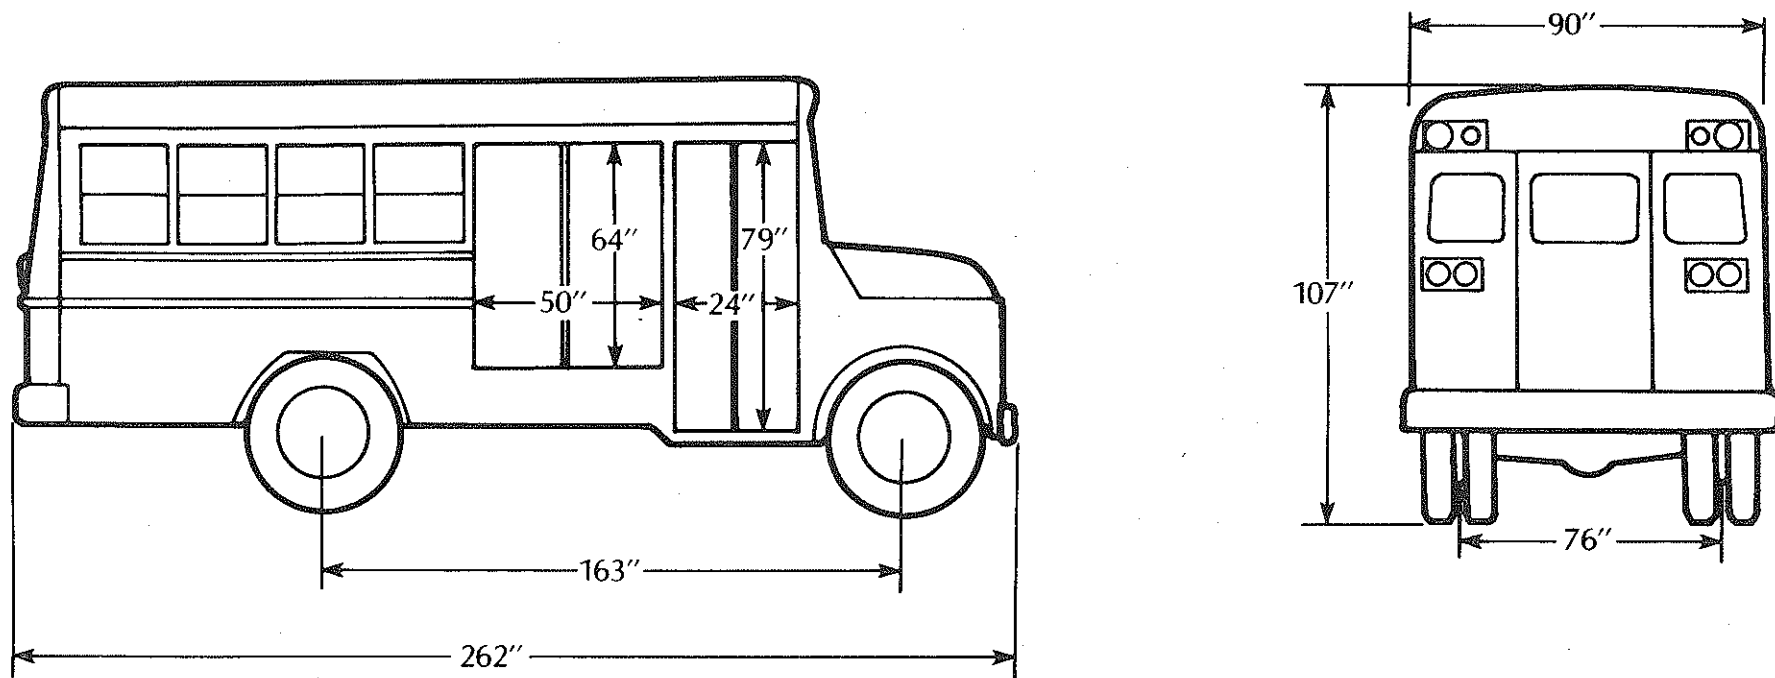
TYPICAL EXTERIOR DIMENSIONS FOR A
